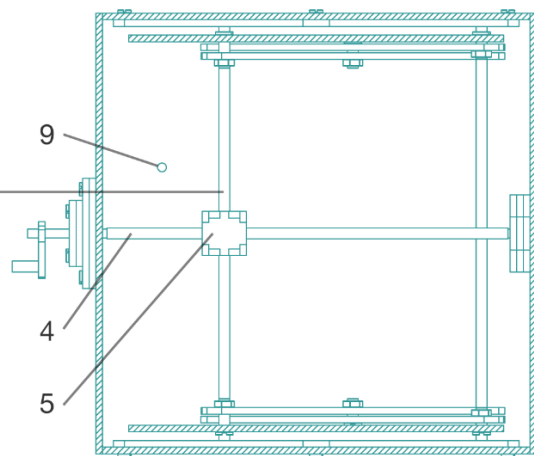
Improved Water Bath General Arrangement Drawing
